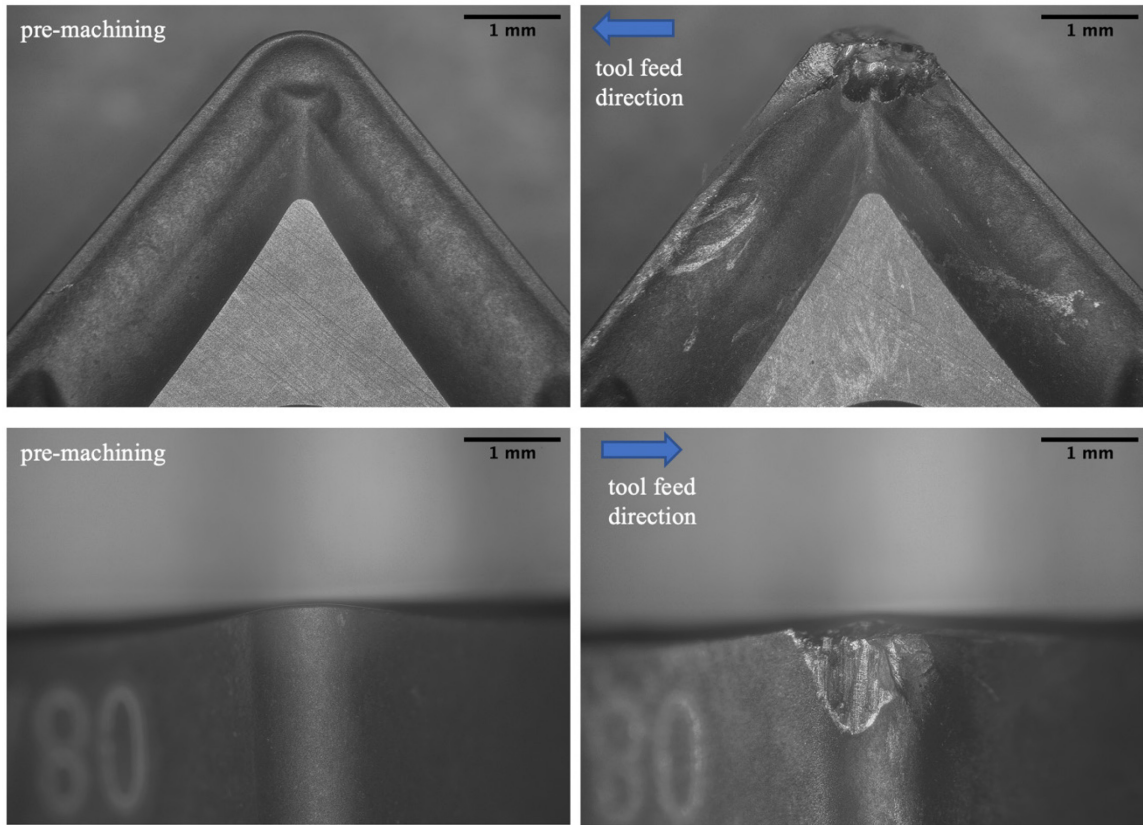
Tool (insert 1C) used during cryogenic machining. Top-left and bottom-left: new tool, before machining. Top-right and bottom-right: tool after catastrophic failure
